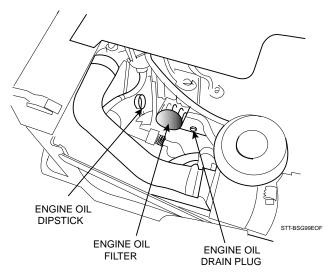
Engine Dipstick, Filter, Oil Drain
